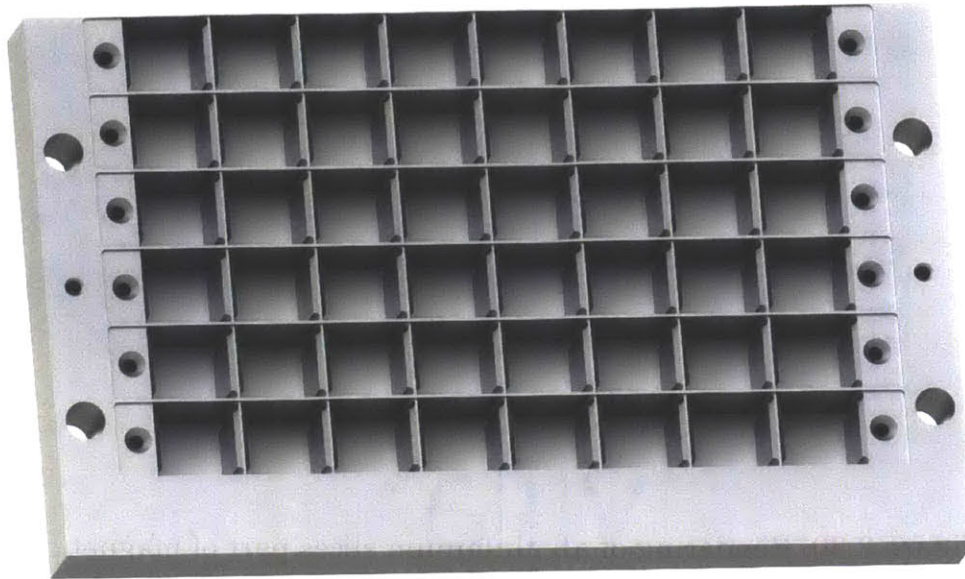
Rendering of a single aluminum fixture for the magnet assembly. Each square pocket has a side length of 12.7mm.
